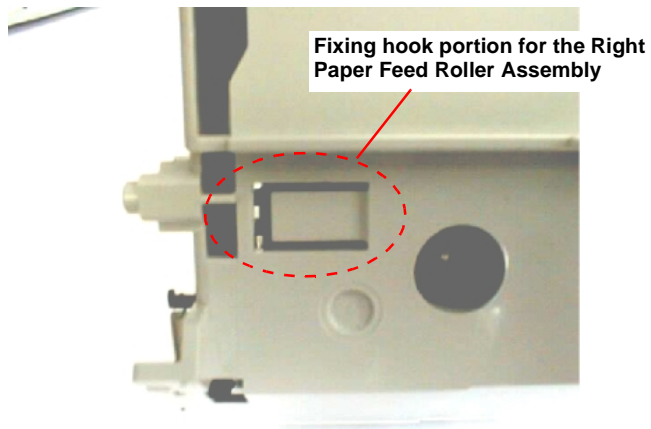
Fixing the Right Paper Feed Roller Assembly
